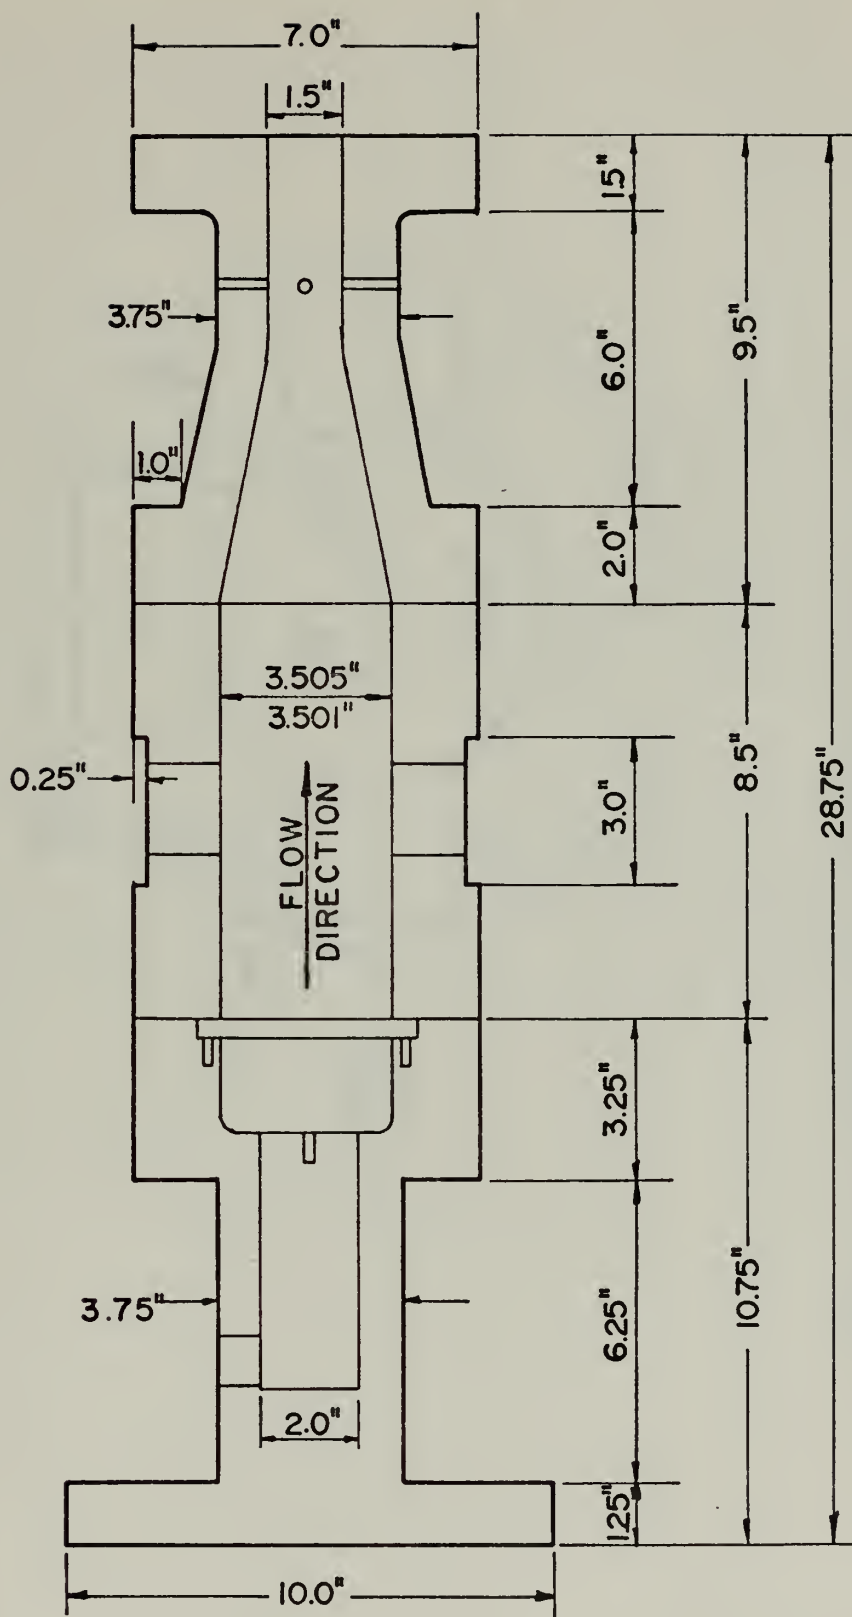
SCHEMATIC OF COMBUSTION BOMB SHOWING PRINCIPAL DIMENSIONS
